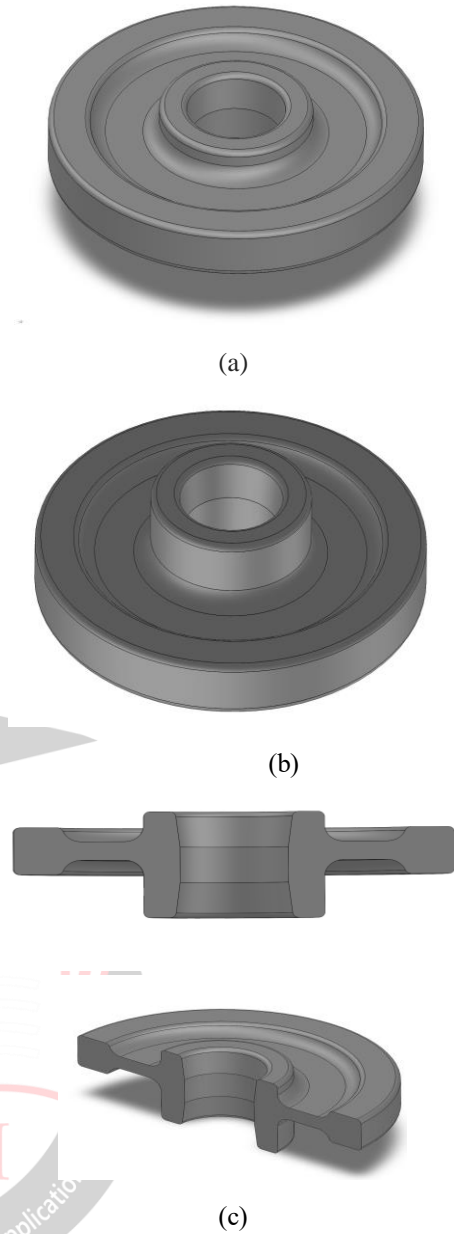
Different View Points of 3D Model: (a) Isometric View; (b) Rear View; (c) Section View.
